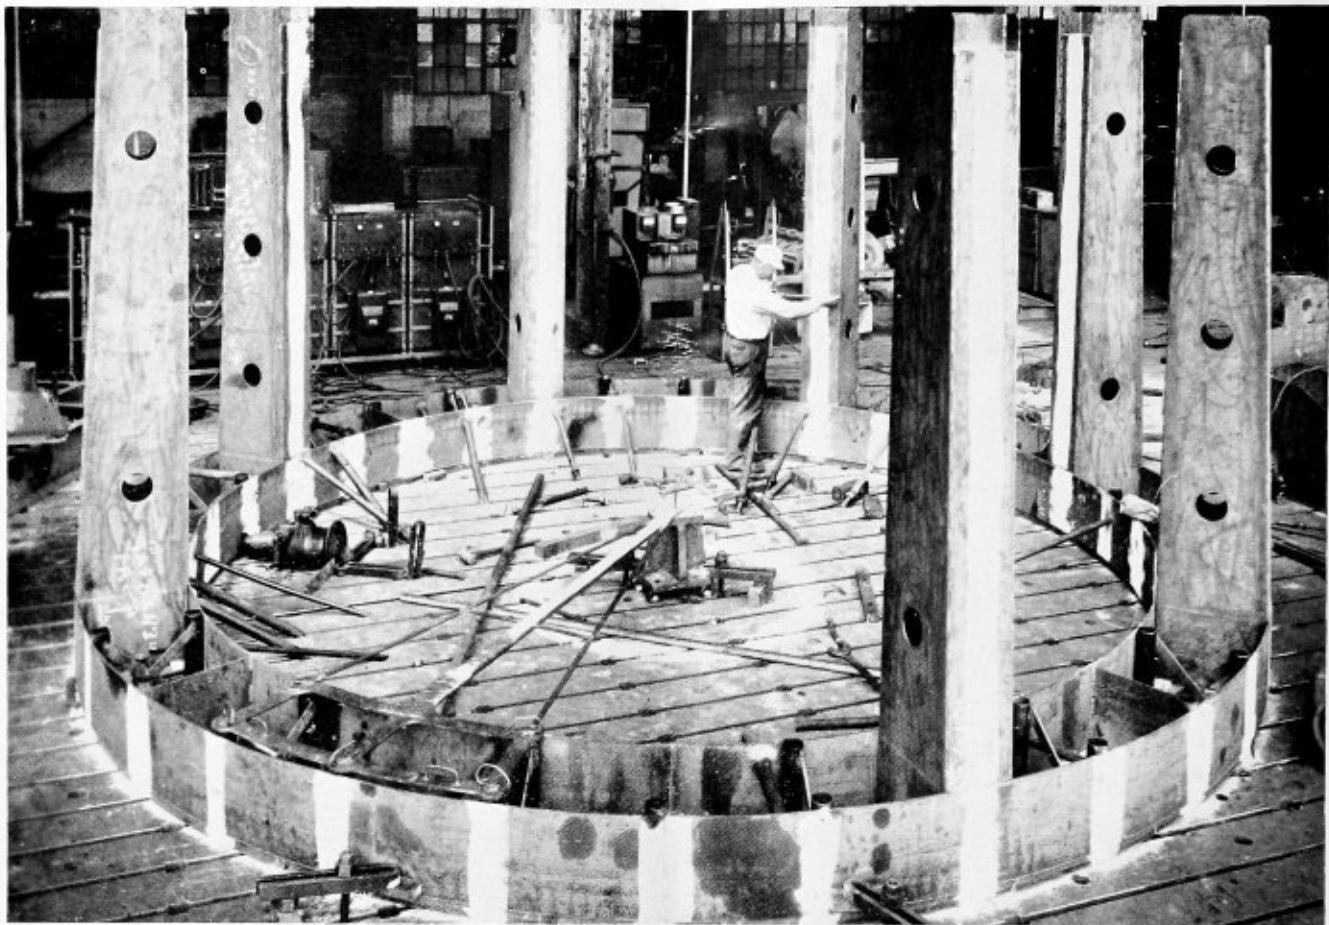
Fabrication of the bottom ring and uprights of the prime focus cage. Fig. 4.—(Left) Work of fabricating the prime focus cage nearing completion, with welders supplying the finishing touches
